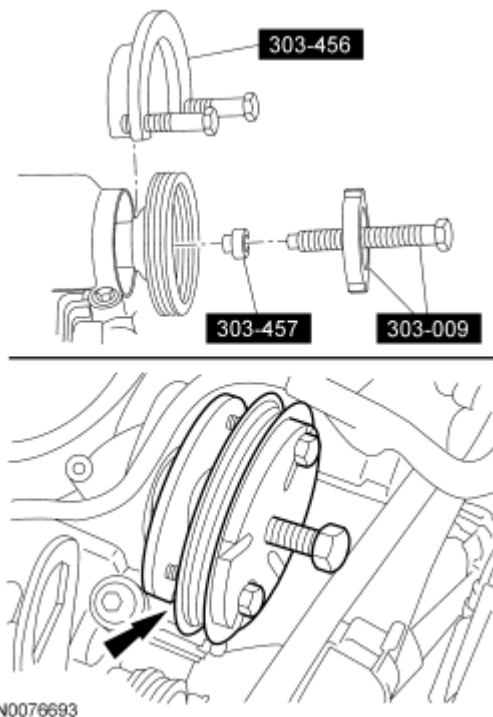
Removing Coolant Pump Pulley Using Special Tools (303-009, 303-456, 303-457)
